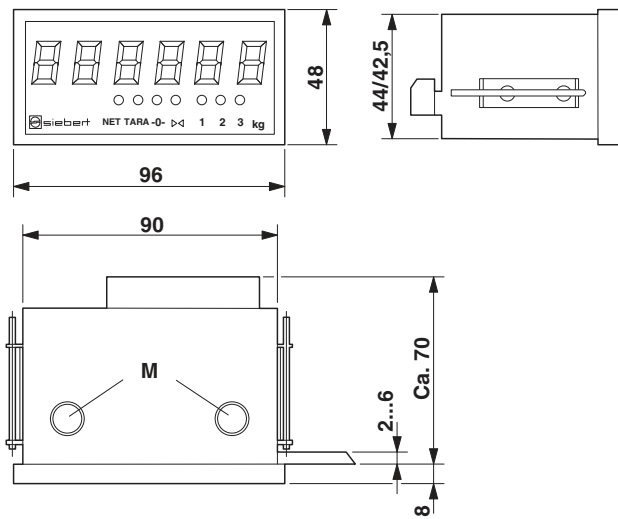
Dimensions of display S102 ... (dimensions in mm)
